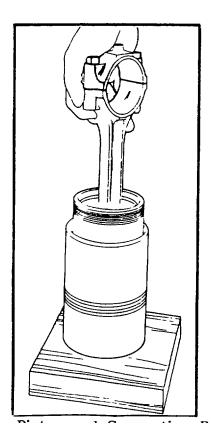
Installing Piston and Connecting Rod Assembly in Ring Co mpressor and Cylinder Liner.
